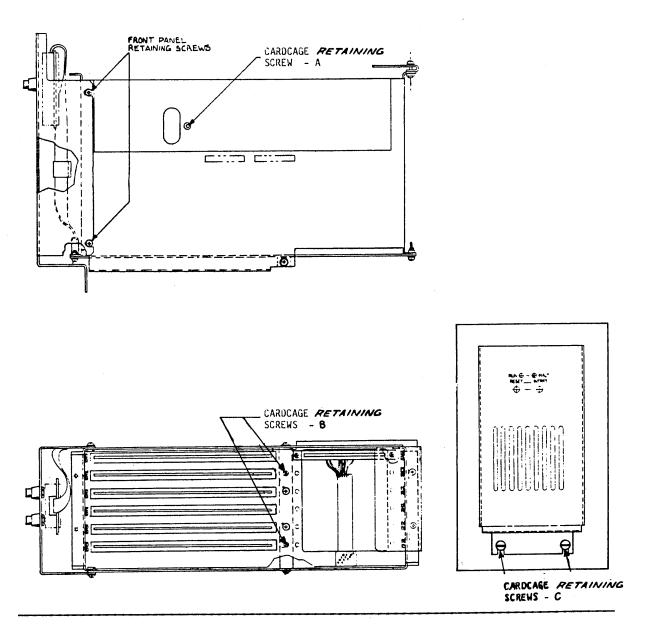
Installation Sequence of Card Cage Retaining Screws
